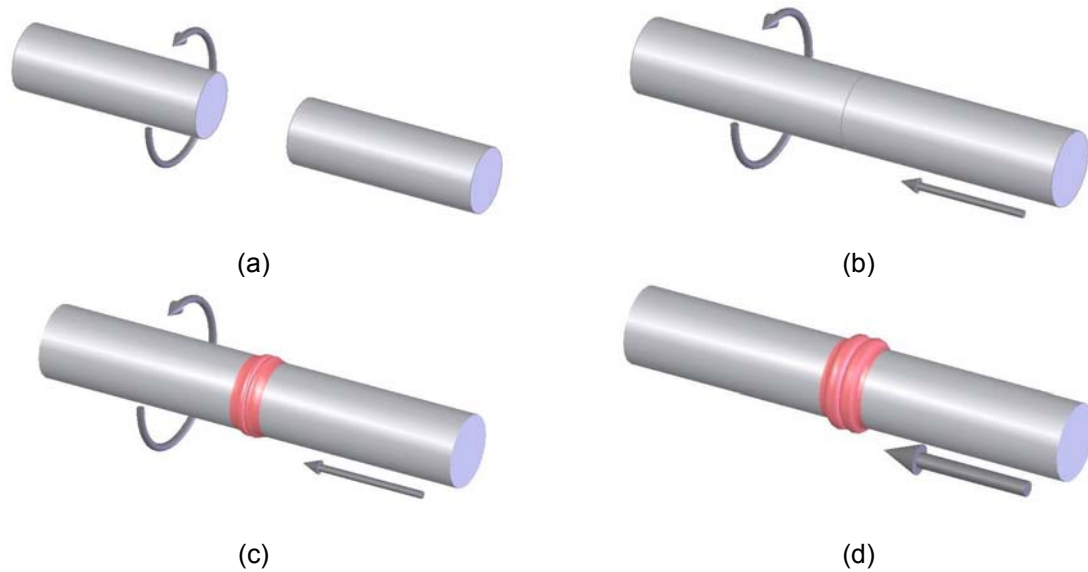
Schematic of basic rotational friction welding.
